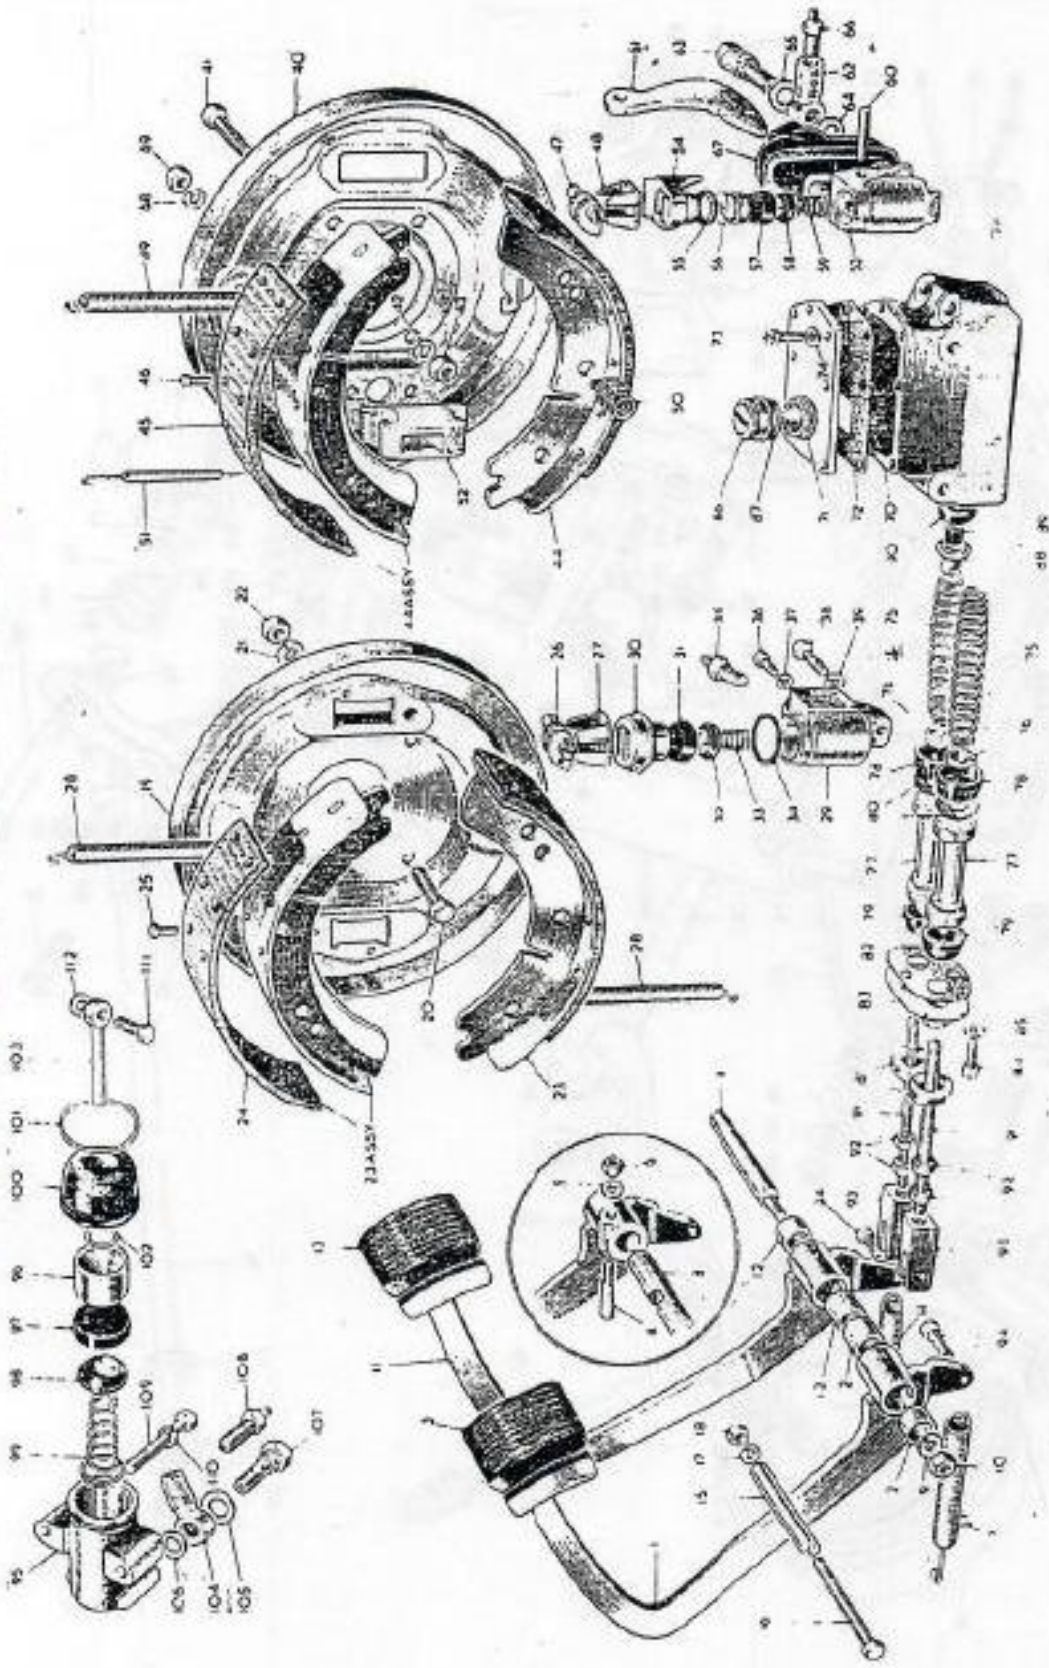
Hydraulic brake components. (See page 4 for key).
